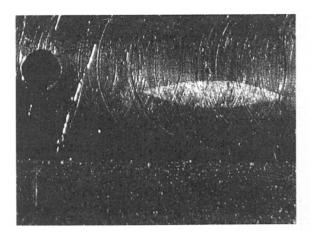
Insert with hole drilling photograph, Girard, et al., 2001.
